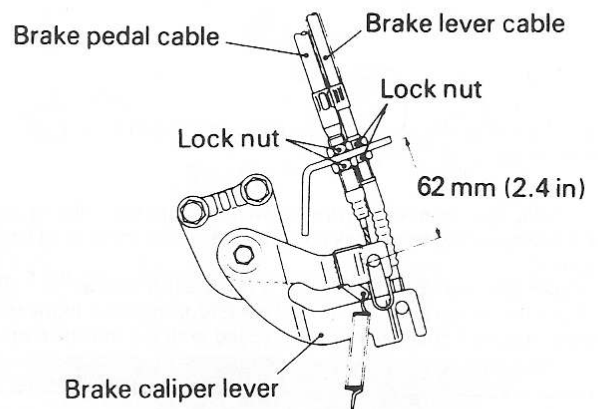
On YT 125/175 J models, the center of the brake pedal cable should be the specified distance from the frame tab before beginning the brake adjustment (Sec 23)
